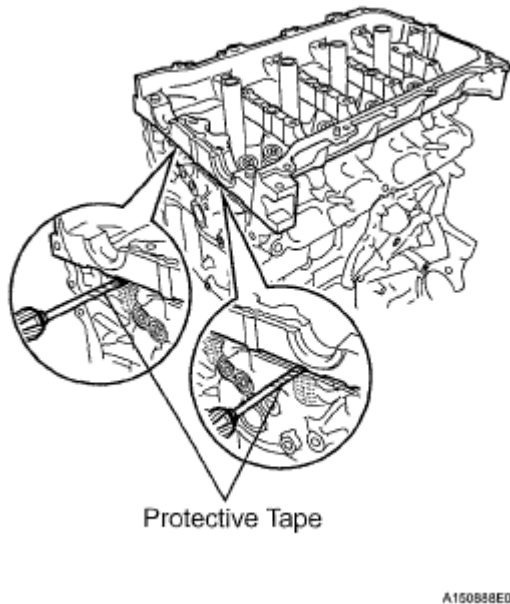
Prying Between Cylinder Head And Camshaft Housing
